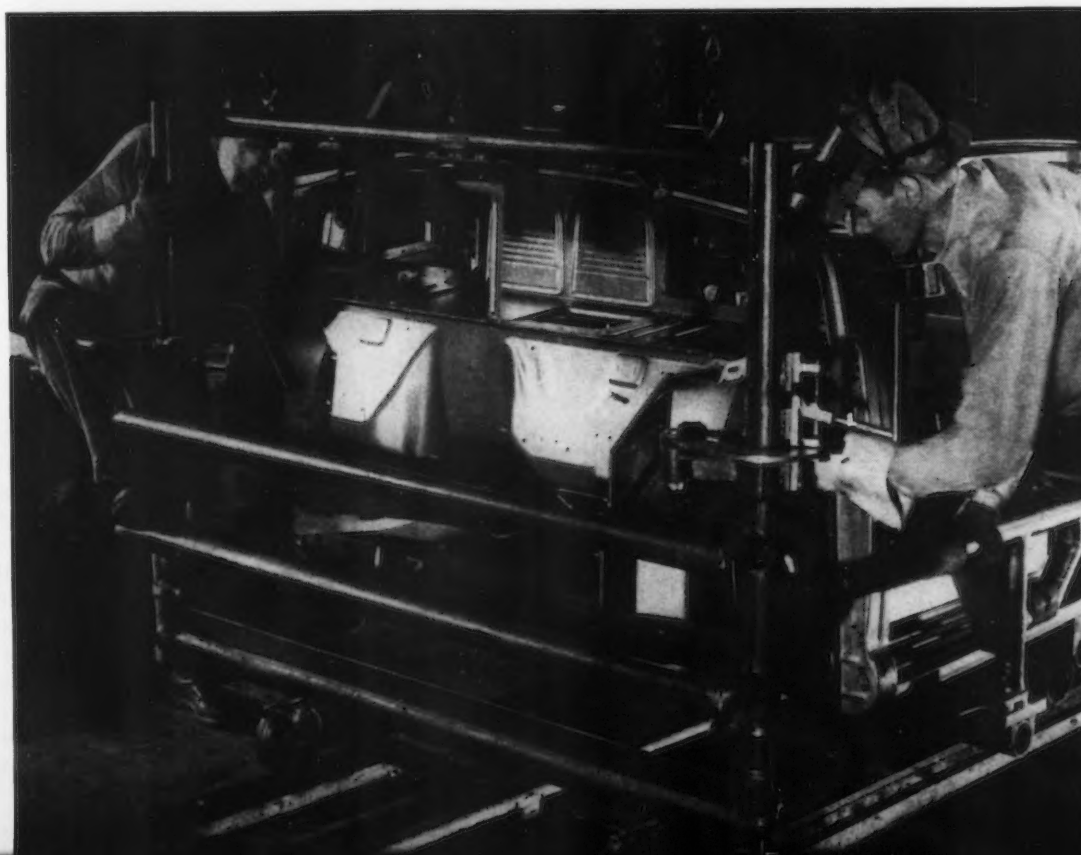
One of the two door plug fixtures is being locked to the dolly and cab components. These frames size the door openings and position the roof and rear panels in relation to the instrument panel, hinge pillar and floor pan while welding.
